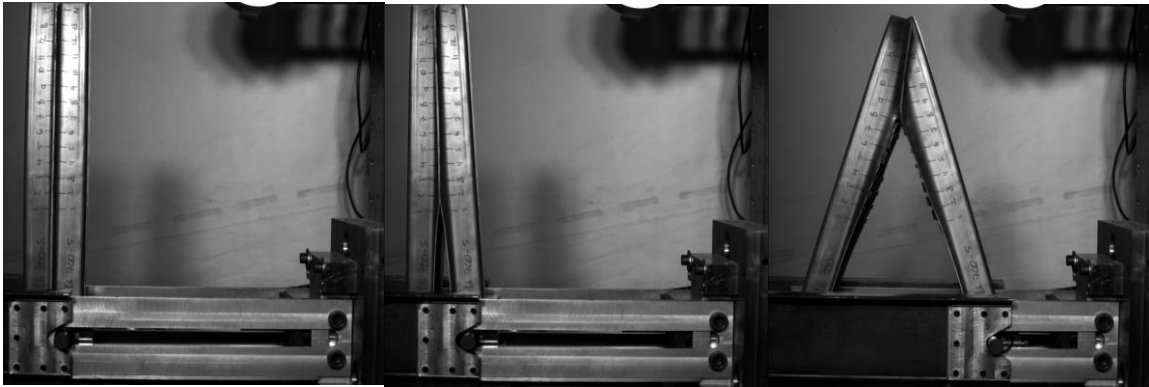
Start (left), first weld failure (center), and end (right) side images of Mode I dynamic test
